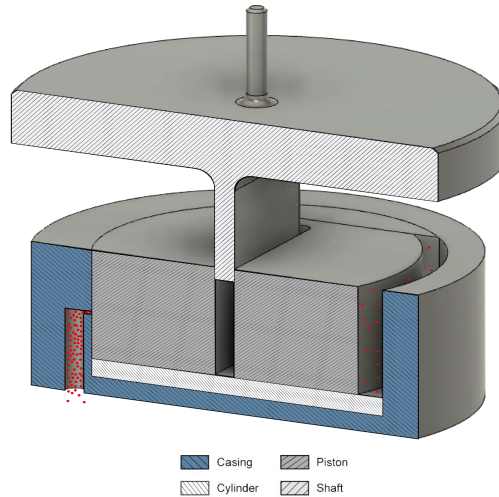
3D view of the rotary cylinder compressor with raised shaft to show the internal components.
